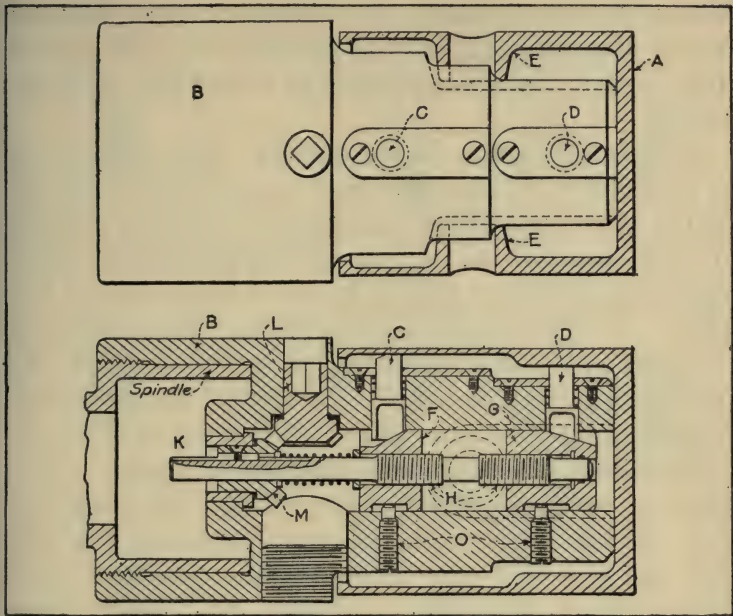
PLAN AND SECTION OF EXPANDING PIN CHUCK FOR A PISTON
